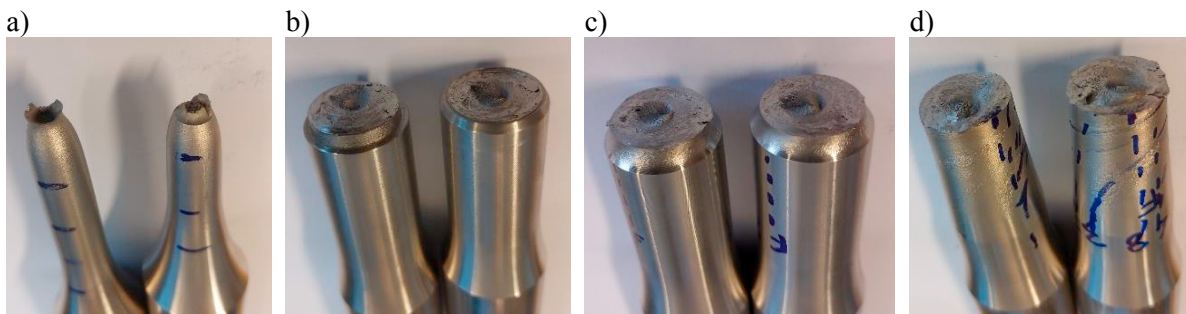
Fracture morphologies: (a) tensile specimen; torsional specimens (b) ON, (c) BN, (d) LI.
